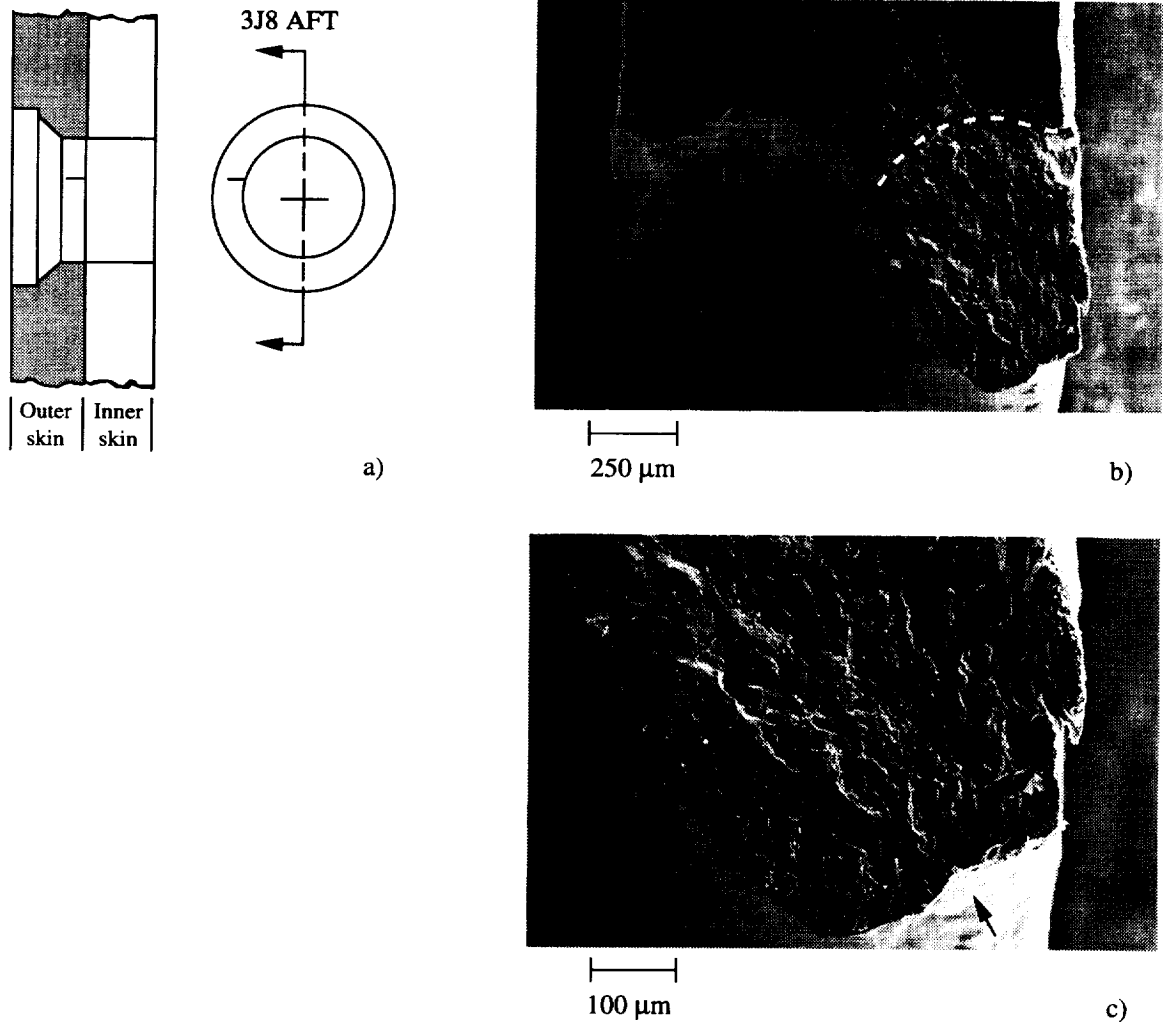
a) The schematic shows the rivet hole 3J8 configuration and the location of the outer skin fatigue crack oriented in the aft direction and about the 10 o'clock position. b) The SEM micrograph shows the fatigue crack at the rivet hole (bottom). The dashed line marks the fatigue crack front. c) The SEM micrograph shows the fatigue crack fracture surface at the rivet hole shank region. The arrow marks the likely region of crack initiation.
